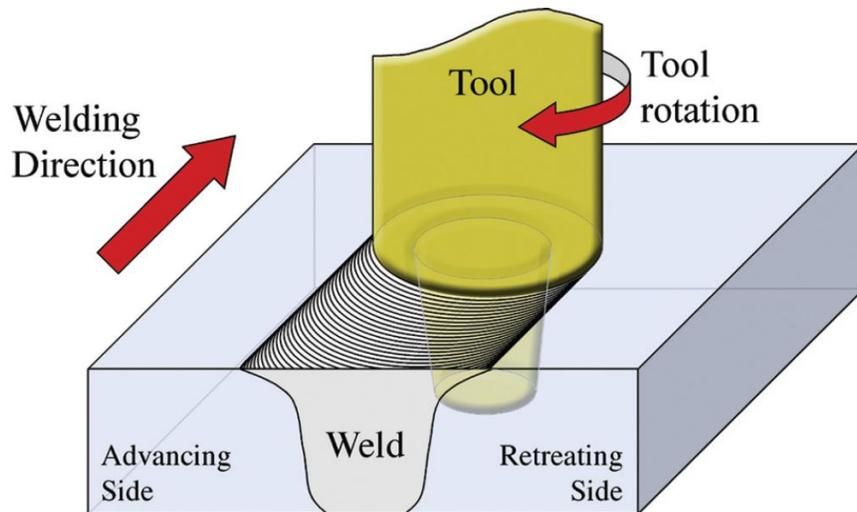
Schematic of the friction stir welding process¹⁷
